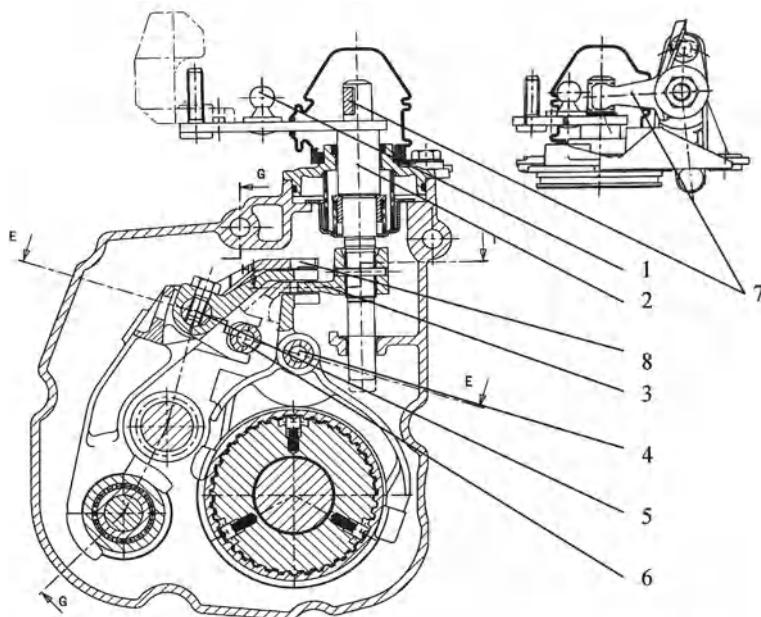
Cross section of a transversal single stage gearbox on the internal shifting mechanism; 4, 5 and 6 are the shifting bars and forks moving the sleeves; a section of the sleeve on the output shaft, a section of the input shaft (*upper left*) and a section of the idling shaft of the reverse speed can also be seen (courtesy of FIAT)
